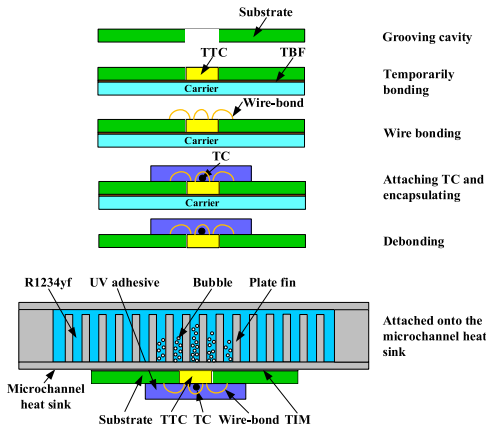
Packaging of TTV1 and assembly process on MHS.
